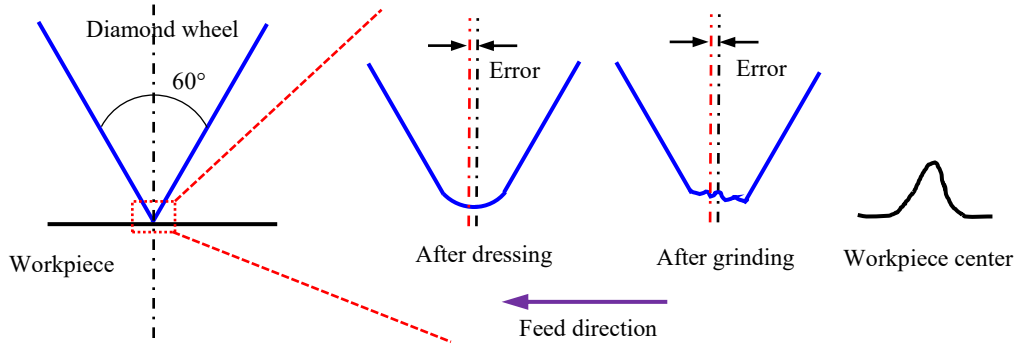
Illustration of the impact of macro wheel wear and error on the form at center
